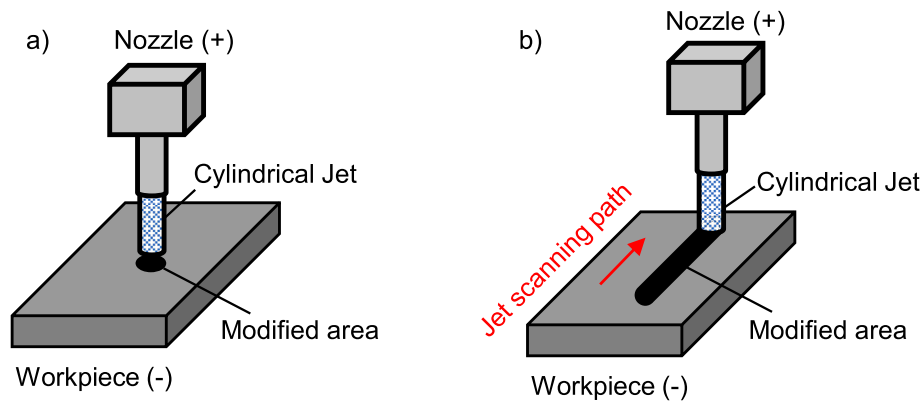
Processing modes: a) Point processing by keeping the jet still and b) Pattern processing by translating the jet over the workpiece.
